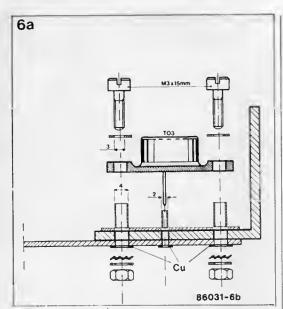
Dimensional outlines of the support bracket which forms the thermal contact between transistors and heat-sink. Also shown are transistor mounting details.
